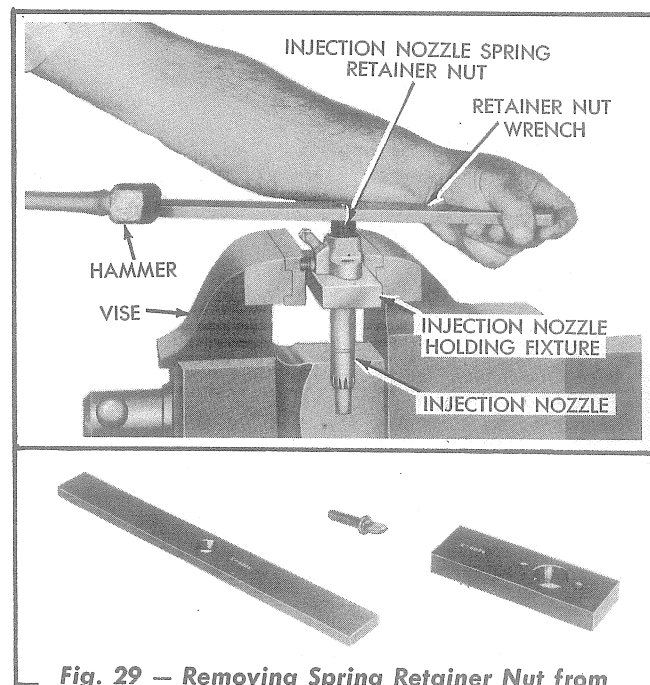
Removing Spring Retainer Nut from Fuel Injection Nozzle (Tractors Prior to Serial No. 4001)
